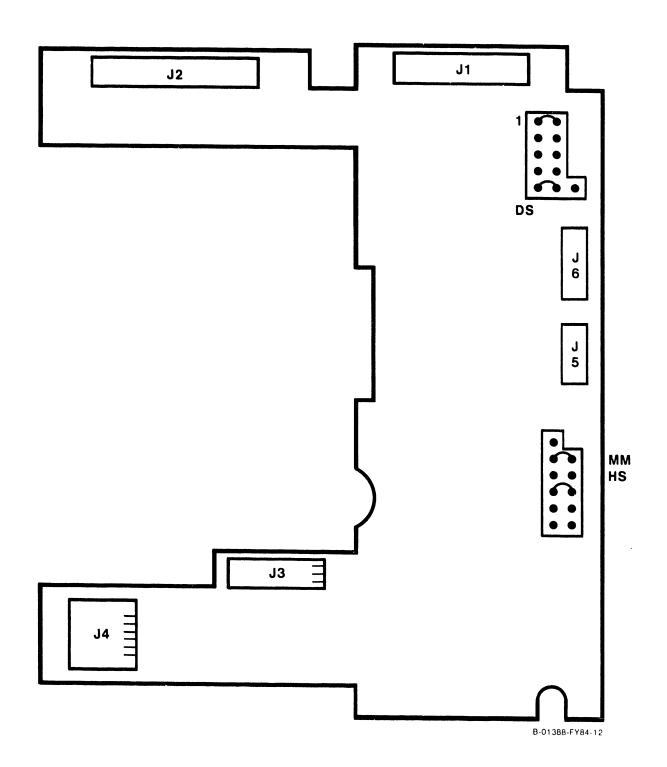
SA455 Diskette Drive PC Board Jumpers
